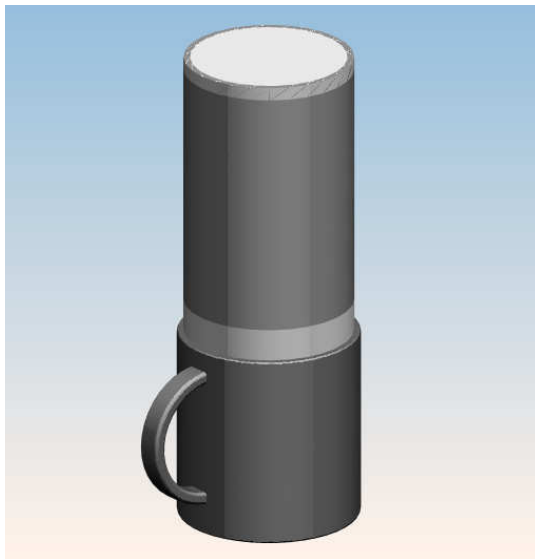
External CAD Drawing of Selected Concept #1: Threaded cup
